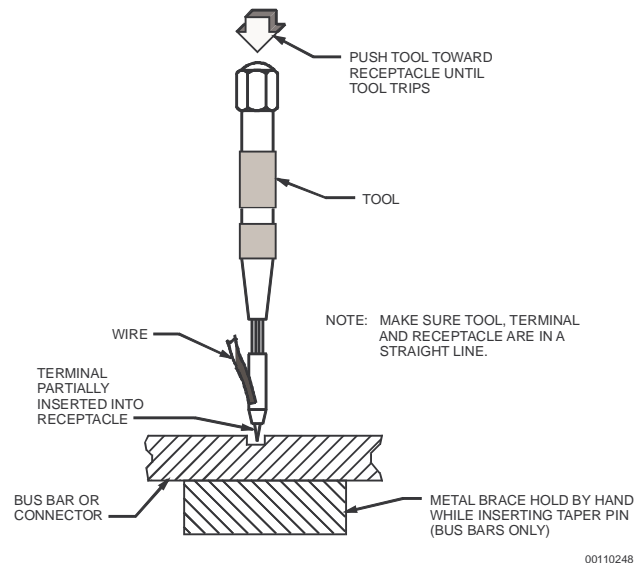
Inserting Taper Pin Into Insertion Tool
